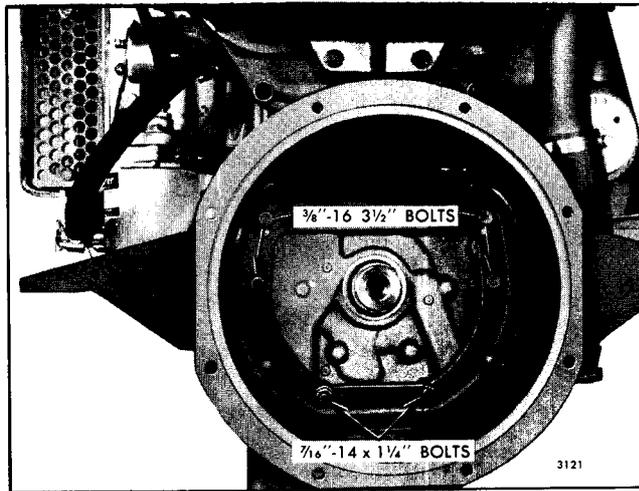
Location of Power Take-Off Adaptor to Engine Bolts
